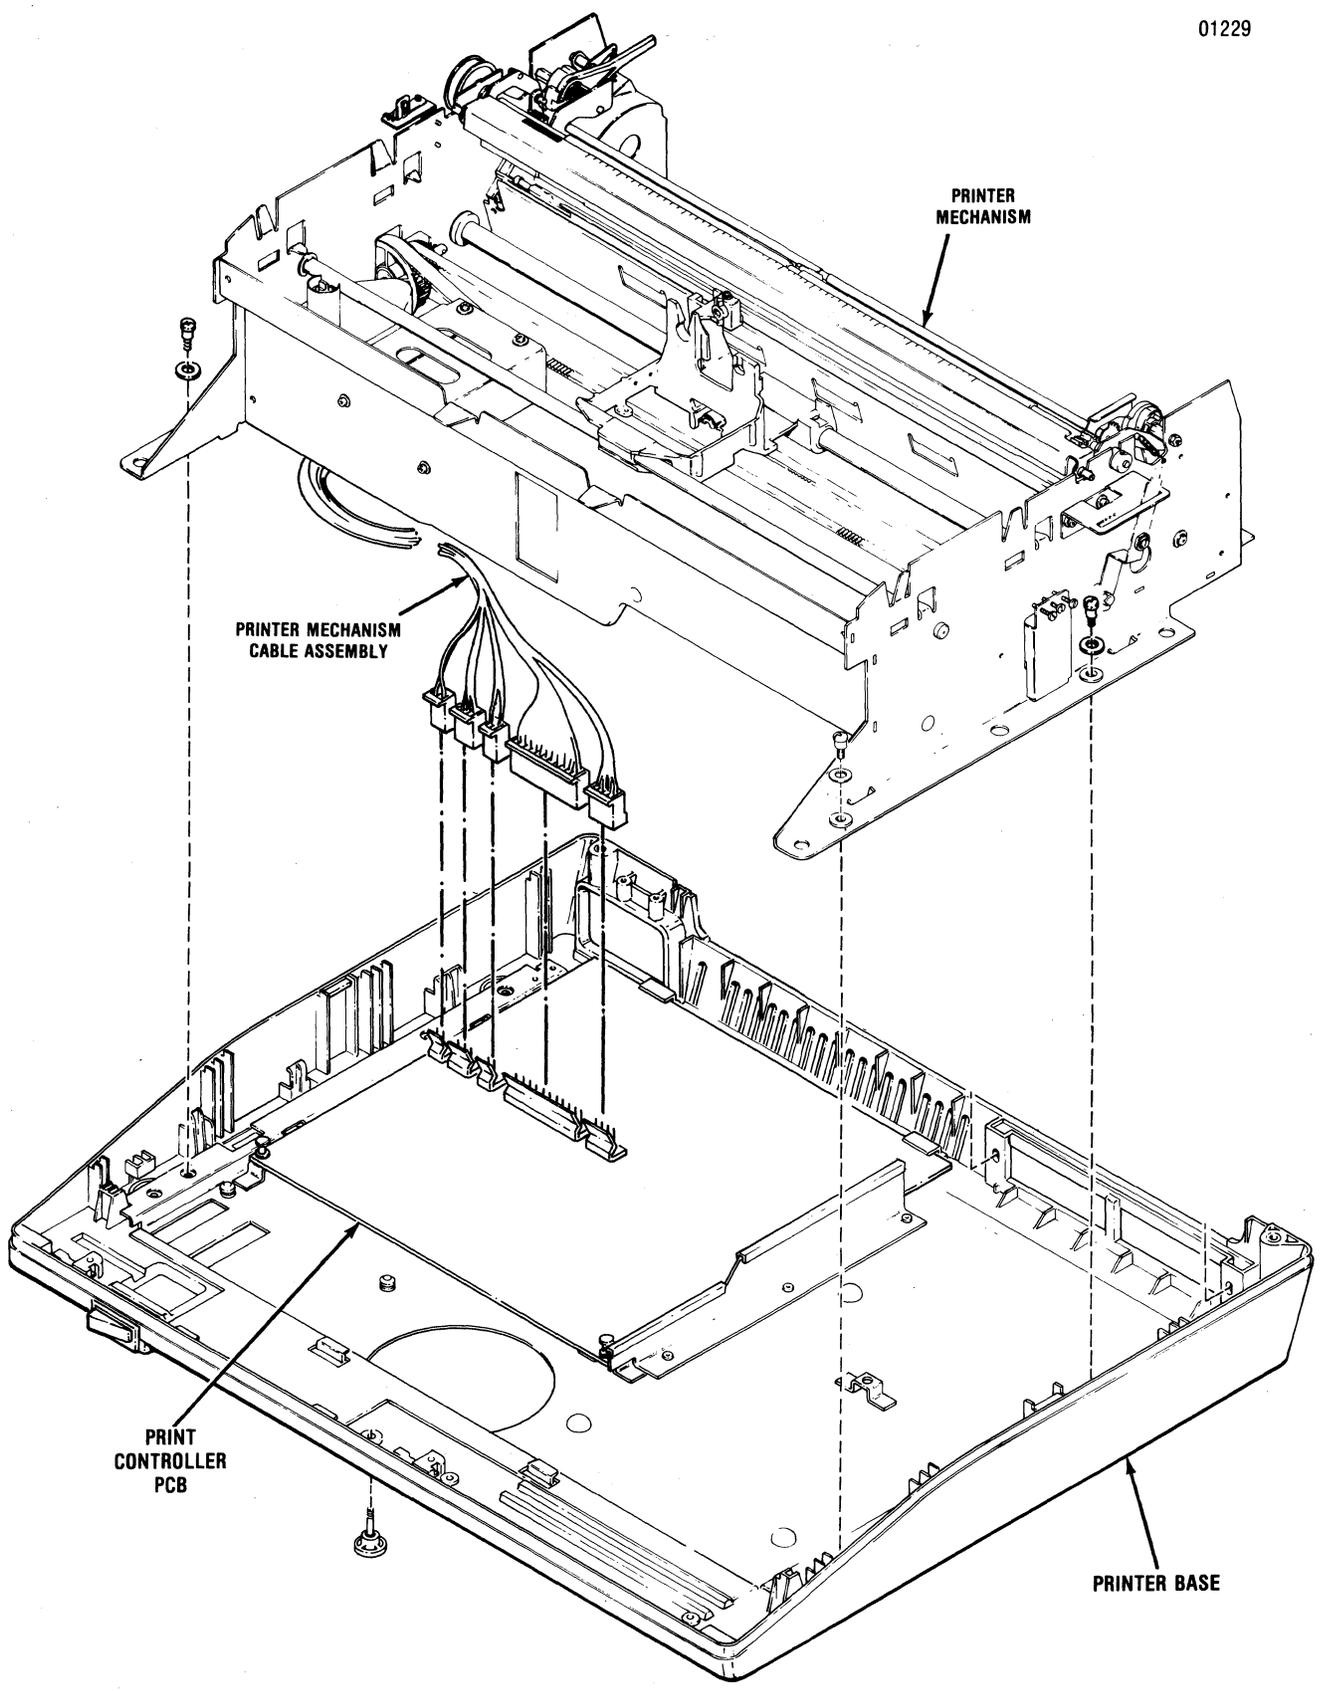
REMOVAL/REPLACEMENT, PRINT MECHANISM
